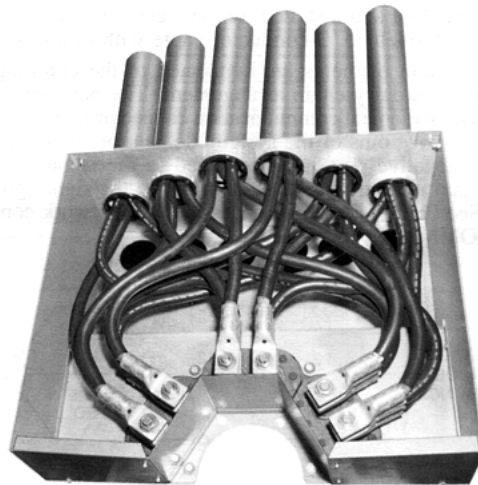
Compressor Terminal Arrangement 18 Lead, Top Inlet
